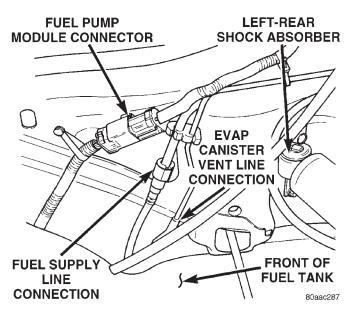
Fuel Tank Connections at Front of Fuel Tank
